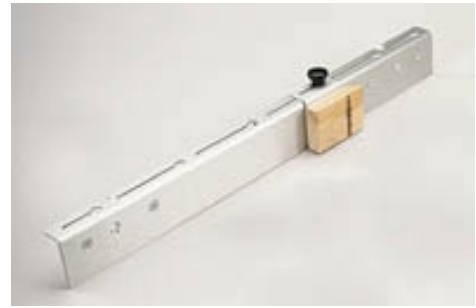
Apply the pad sawing technique to drilling so you can pad drill.
